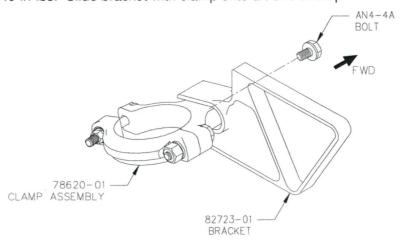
Clamp and Bracket Assembly (Right side shown, left side opposite)
